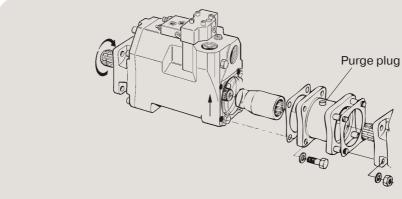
Adaptor kit (P/N 379 7795) for tandem coupling.
